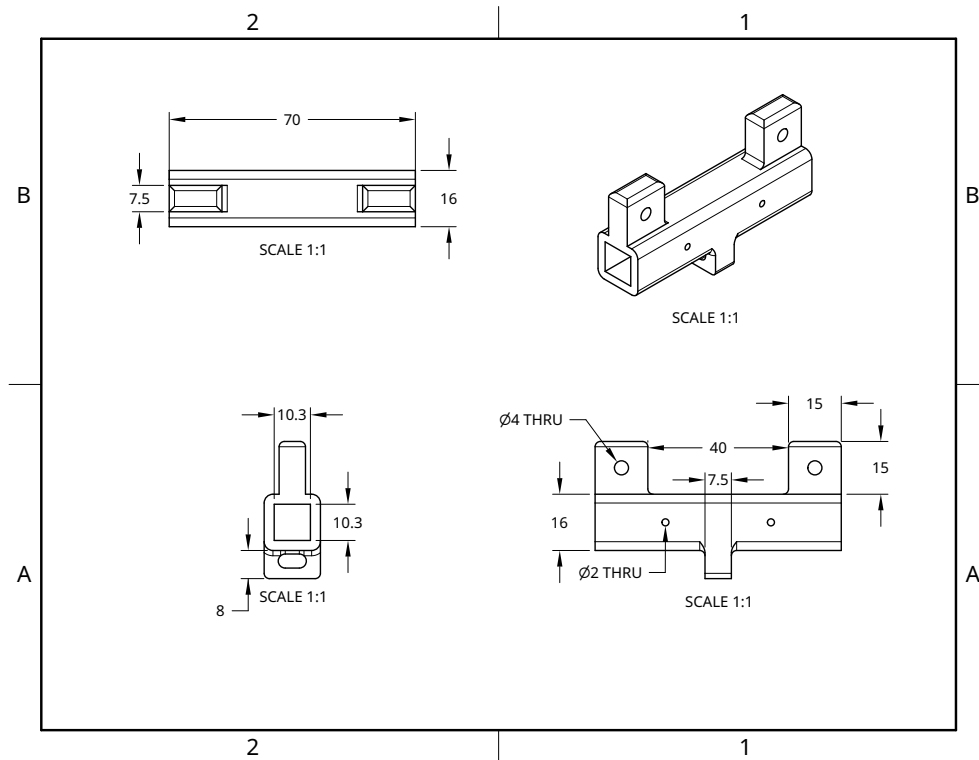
CAD drawing of the cart component of the catapult launcher. All quantities are given in millimetres.
